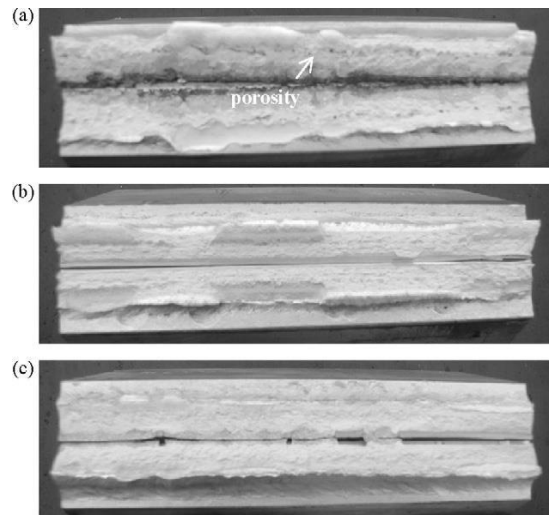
Views of fracture surface of multi-pass welded specimens: (a) Ar, conventional, (b) Ar + 67%He, conventional and (c) Ar to He, alternate.
